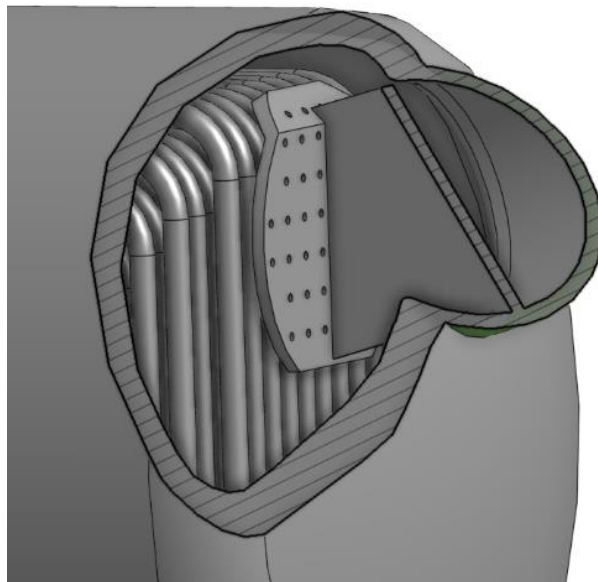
Section view of Onshape impingement baffle reconstruction.
